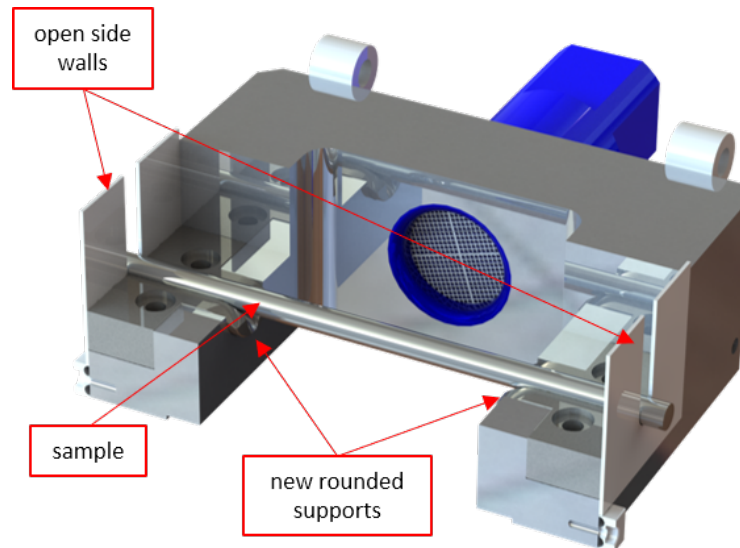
Cross section view (CAD model) of the modified chamber, highlighting the new rounded supports and side walls.
